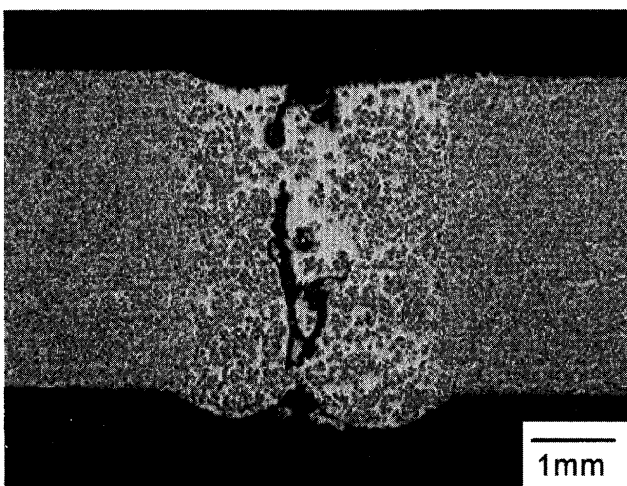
Macrostructure of cross section of YAG laser welded joint of 10%Al₂O₃ 6061 MMC.
